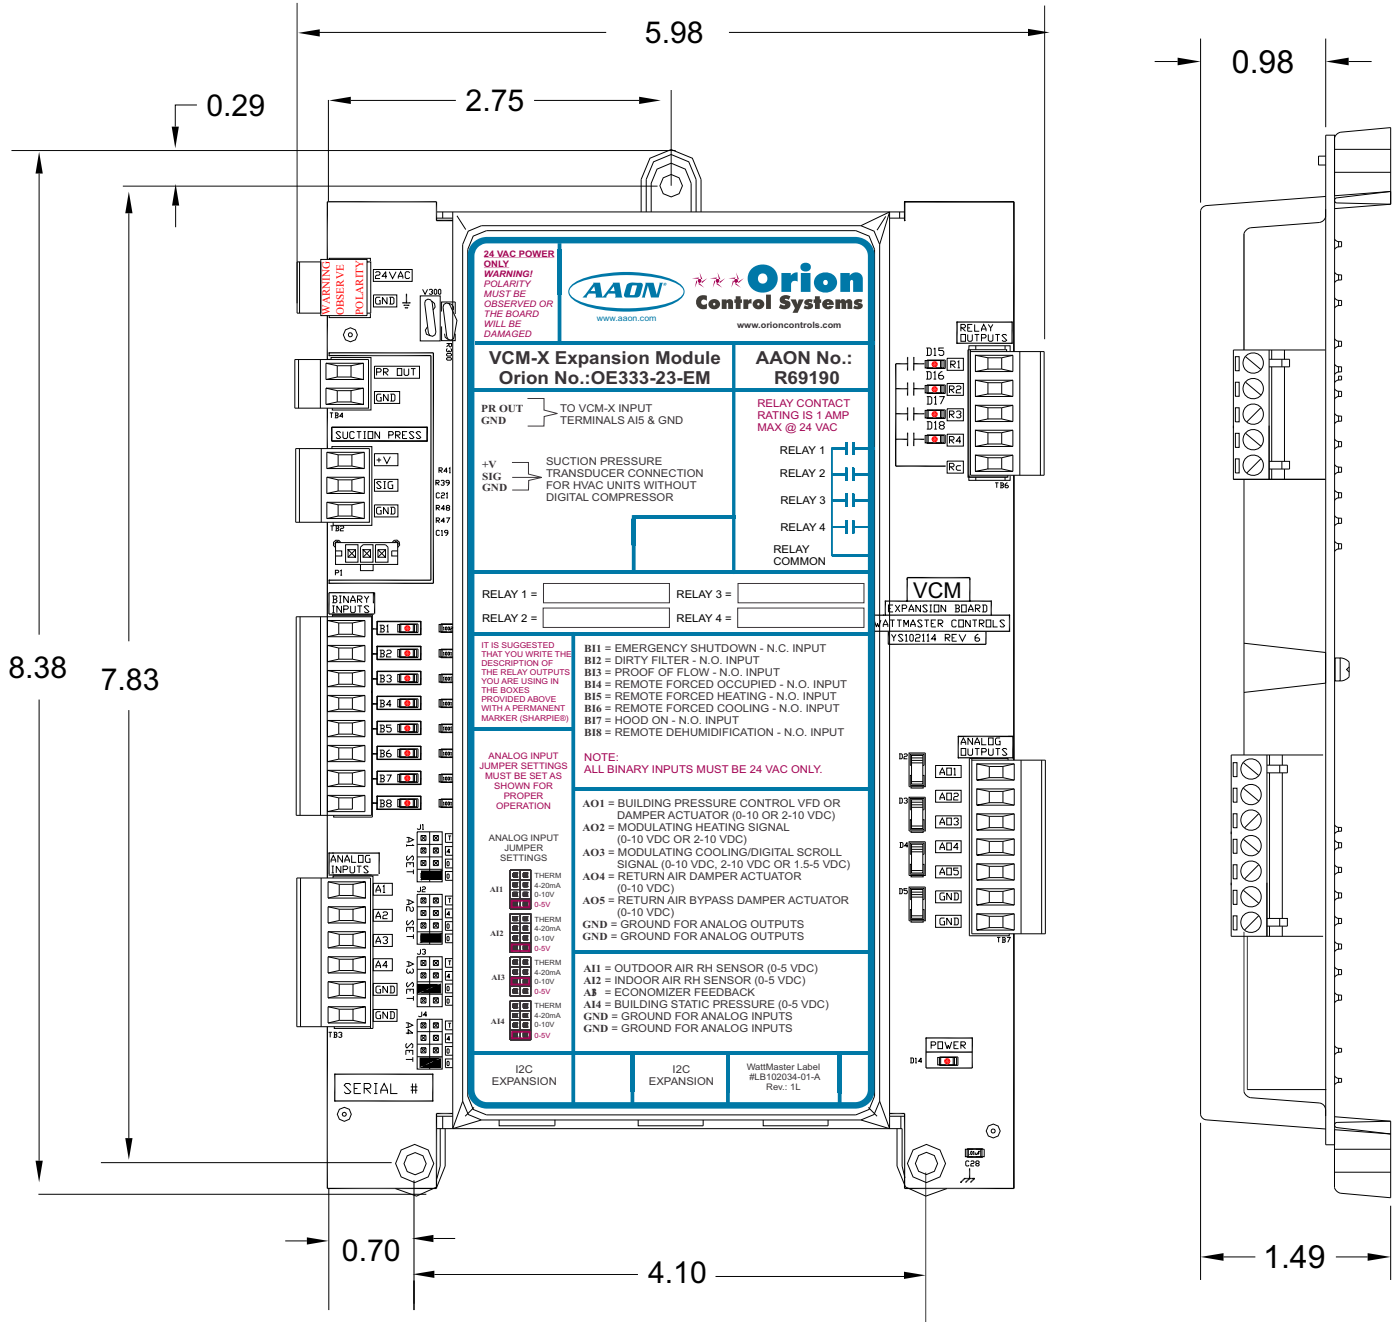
OE333-23-EM – VCM-X Expansion Module Dimensions
